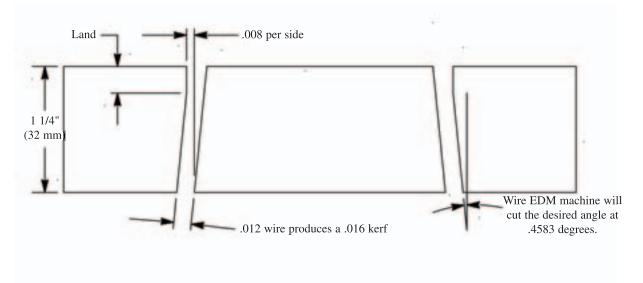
12 Calculating Desired Clearance (Clearance is exaggerated)
